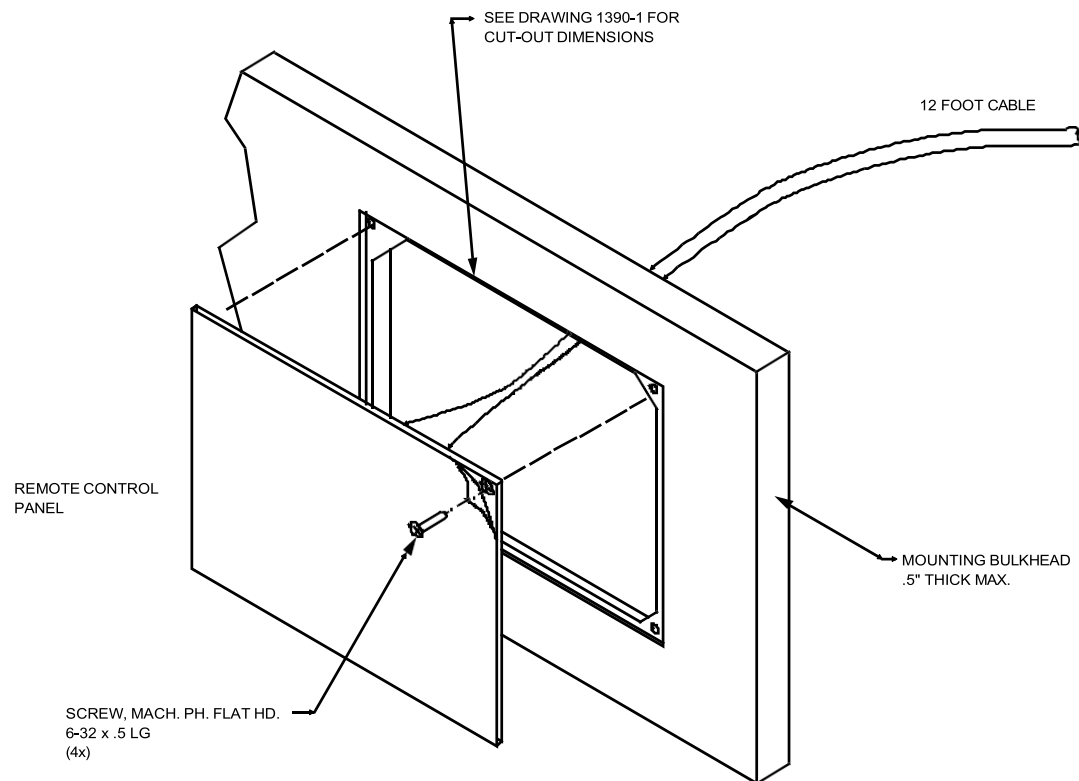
shows a recommended mounting plate configuration with mounting dimensions to attach the panel to a surface. The 12-foot cable connects to J2 on the Controller.
